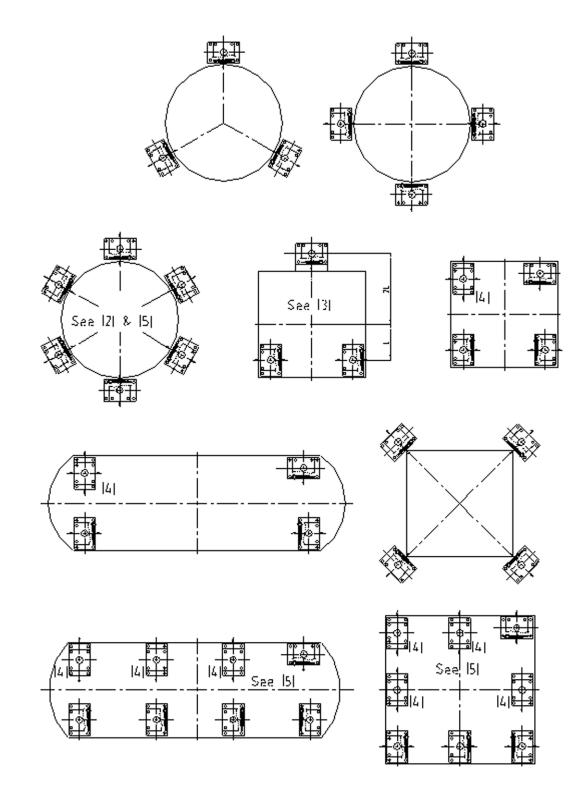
Plan View of Mounting Arrangements with Stabilizers
